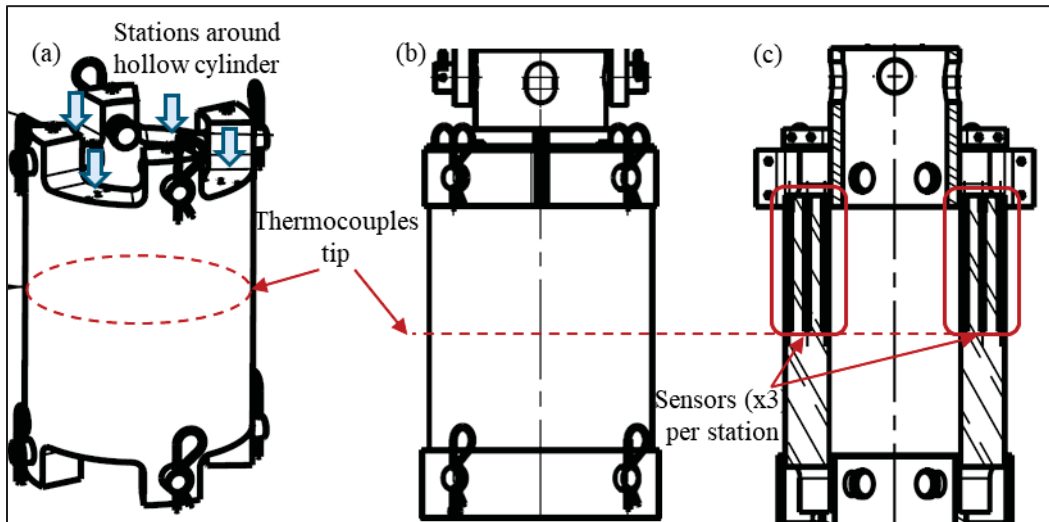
Hollow cylinder (HC) quench probe a) iso view, b) assembly setup, c) cut-view of assembly
